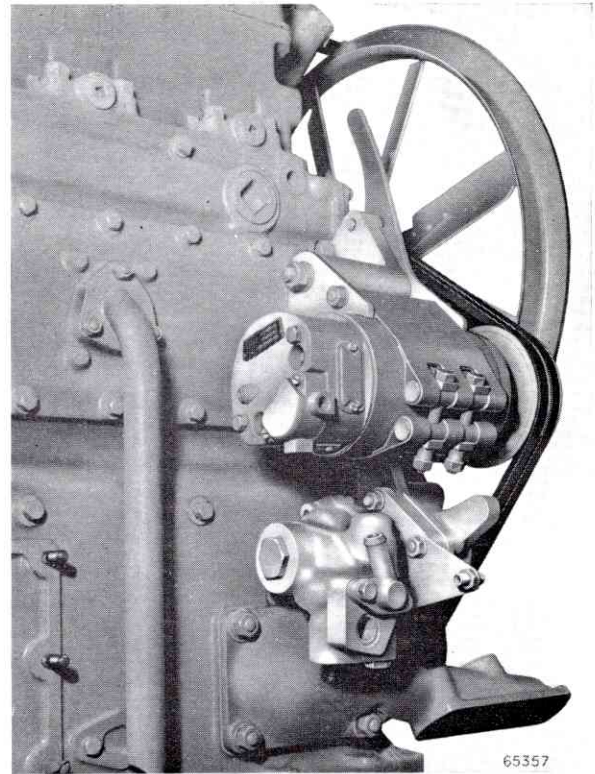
VIEW OF THE STEERING GEAR PUMP
